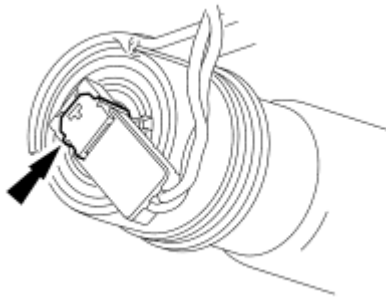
Identifying Driver Seat Side Air Bag Module Electrical Connector Locking Clip
